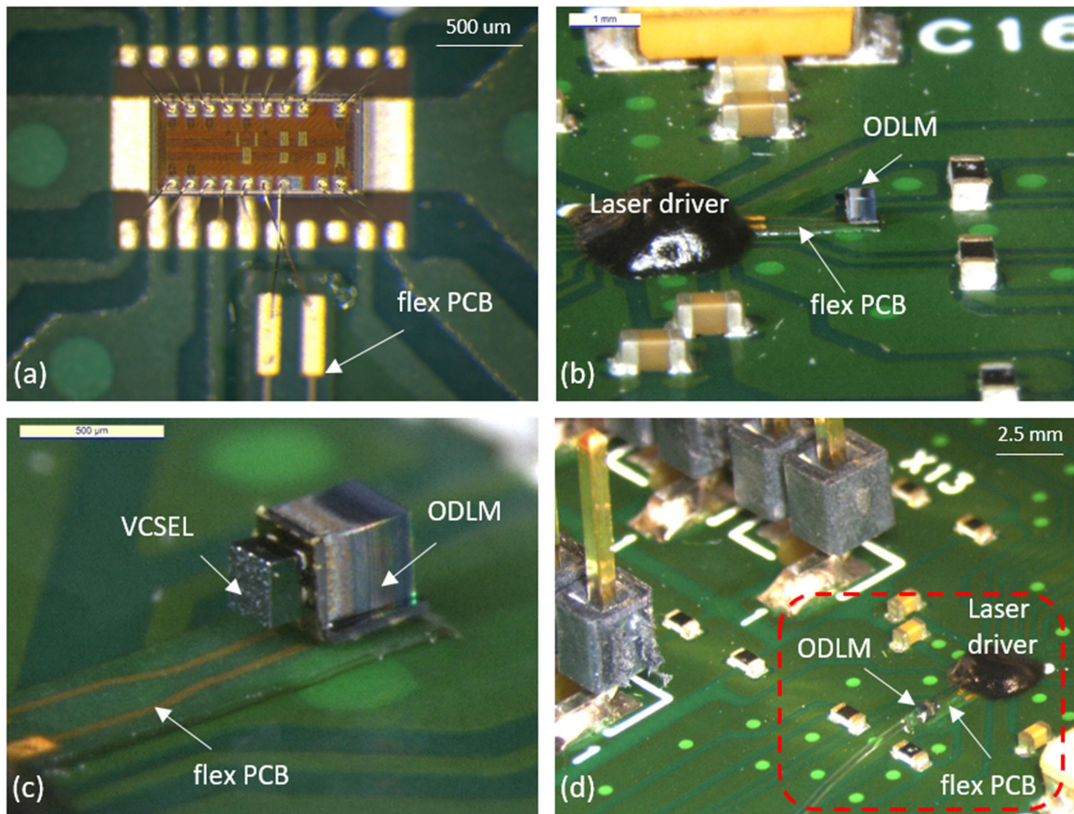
ODLM connected to catheter laser driver with flex PCB. (a) Customized laser driver for catheter application, wire-bonded to the test PCB and the 40 μm -thick flex PCB; (b) ODLM is connected to laser driver via a flex PCB. The laser driver is in the black polymer glob top; (c) Side view of ODLM assembled on a flex PCB; (d) overall view of ODLM connected to the laser driver on a testing PCB.
